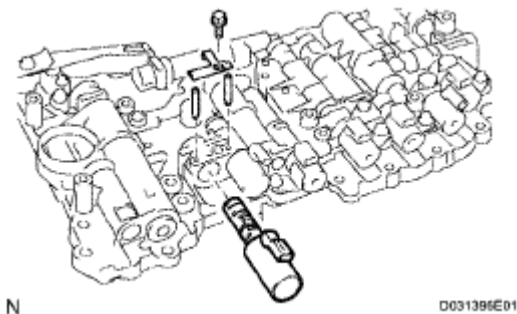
Identifying Bolt, Lock Plate And Straight Pins
